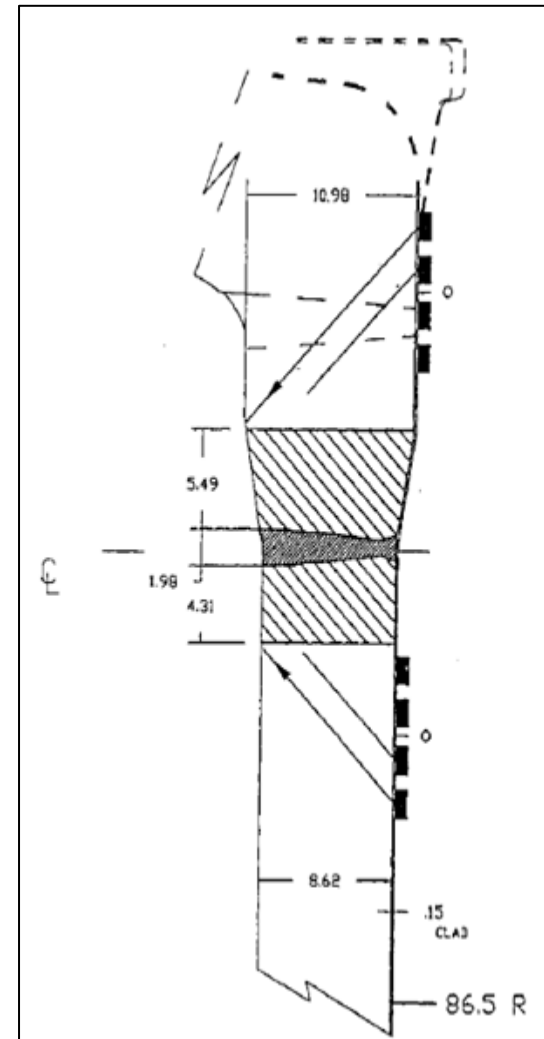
Plant I Nozzle Shell to Lower Shell Circ Weld
